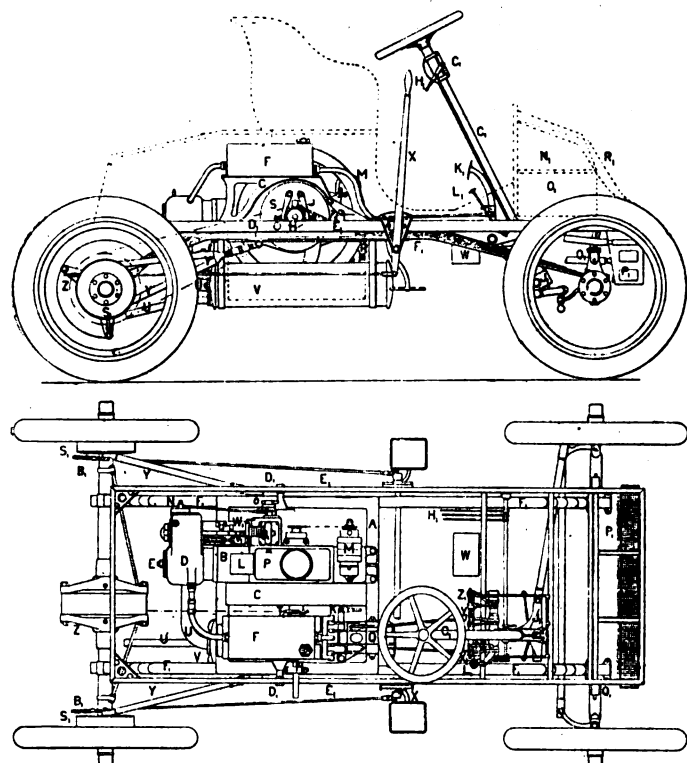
Elevation and Plan of Adams-Hewitt 10-h.p. Car.
